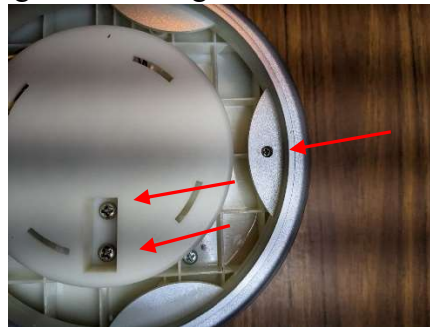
Screws securing mounting bracket for circular platform and 5th screw securing enclosure top to bottom
